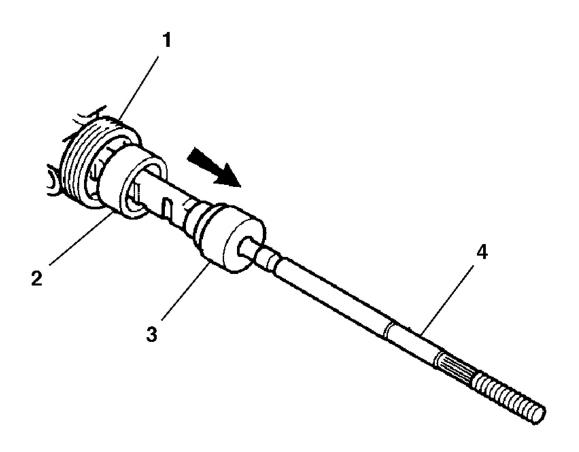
Identifying Shock Dampener & Inner Tie Rod Housing Courtesy of GENERAL MOTORS CORP.
